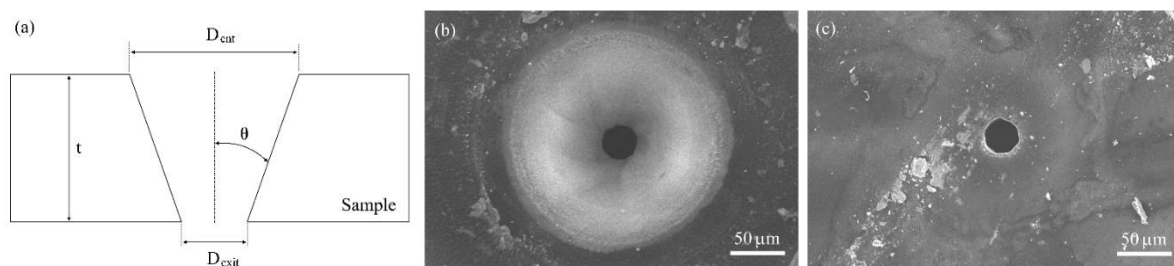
(a) The geometry of the hole. Scanning electron microscope (SEM) view of the drilled hole in a diamond using fs laser: (b) Front view and (c) rear view.
